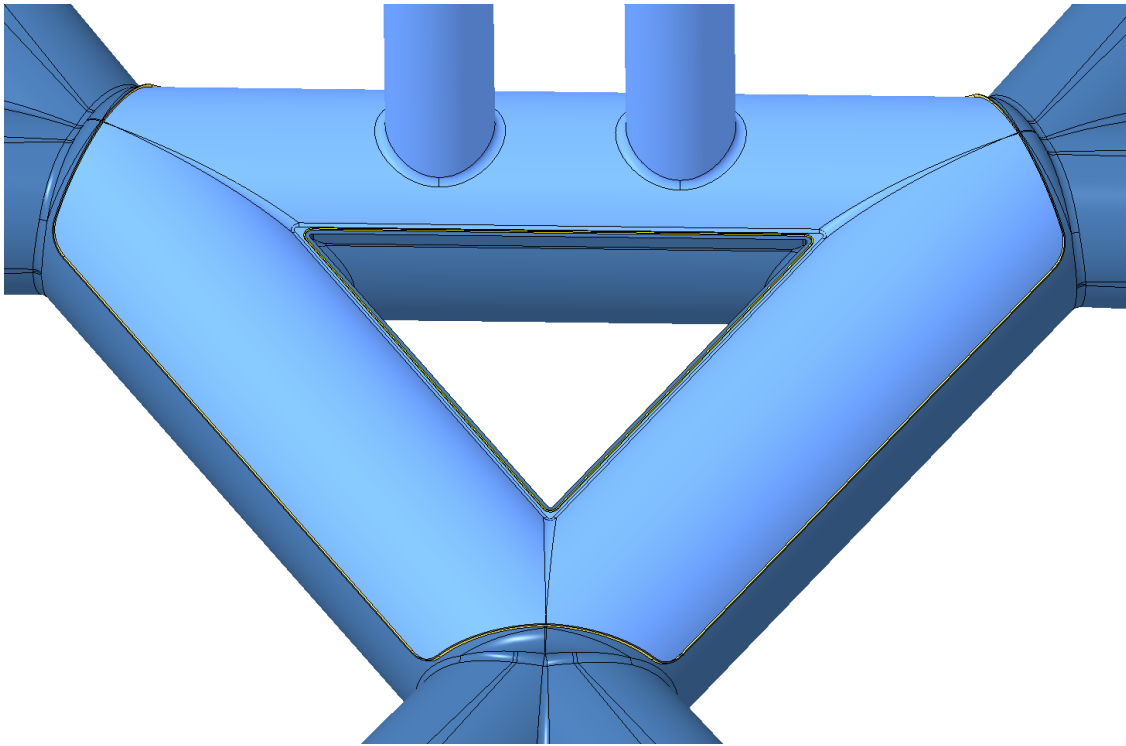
Tube Vacuum Cap welded to Tube Vacuum Body in 2 welds. The Inner weld is a simple straight down weld in a single plane. The Outer weld will be made in 6 passes. Each tube intersection will be welded by starting in the straight, but not perpendicular to the face. The weld will then translate around the corner before rotating around the tube intersection before translating back to the next straight. The straight sections will then be welded to join the tube intersection welds.
